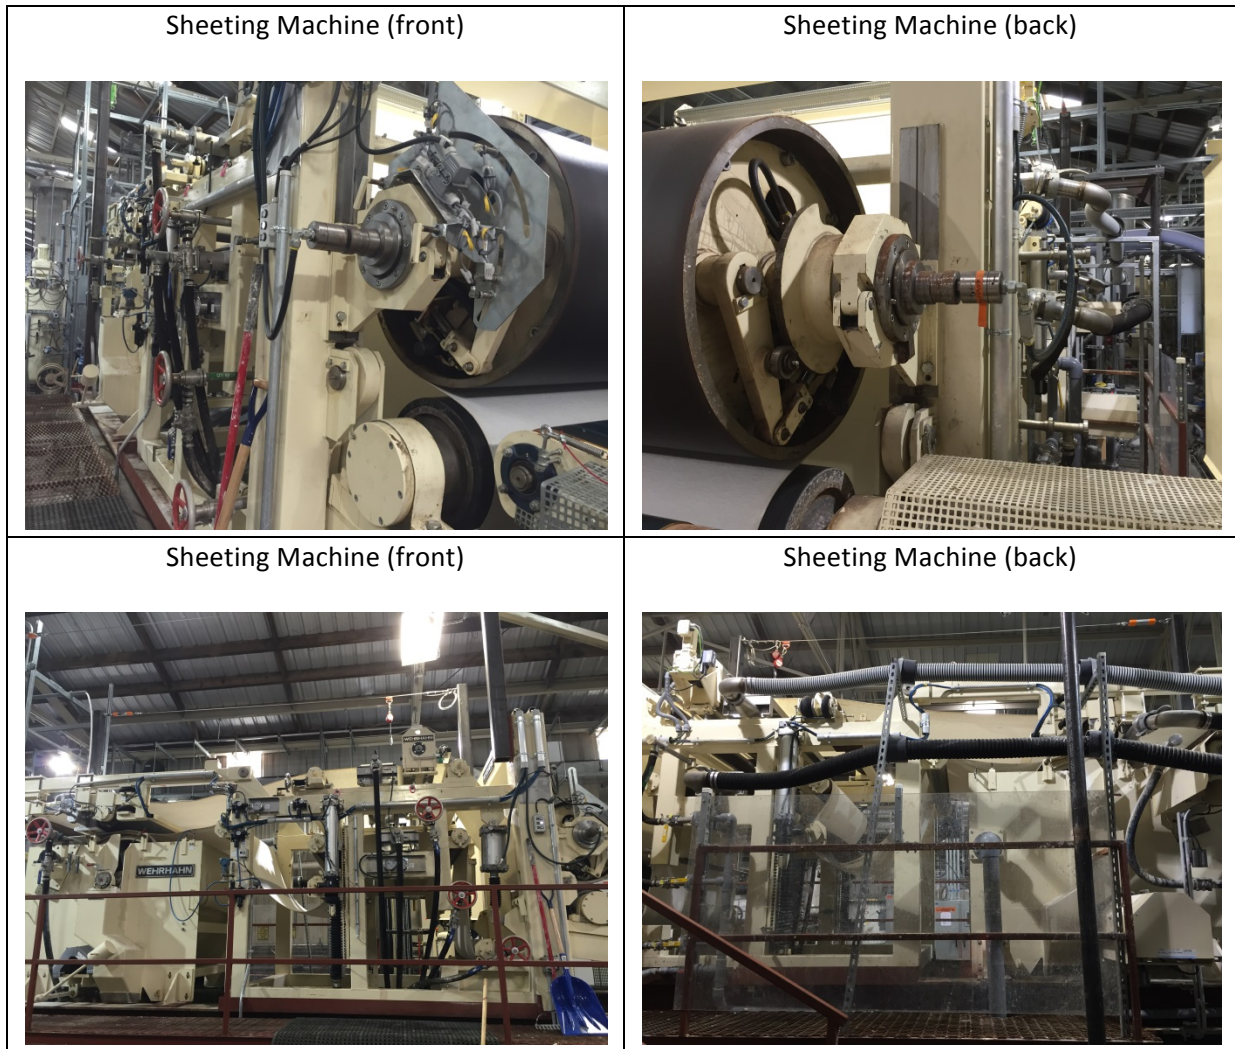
Fiber cement board sheeting machine used in the CCMP pilot demonstration plant
